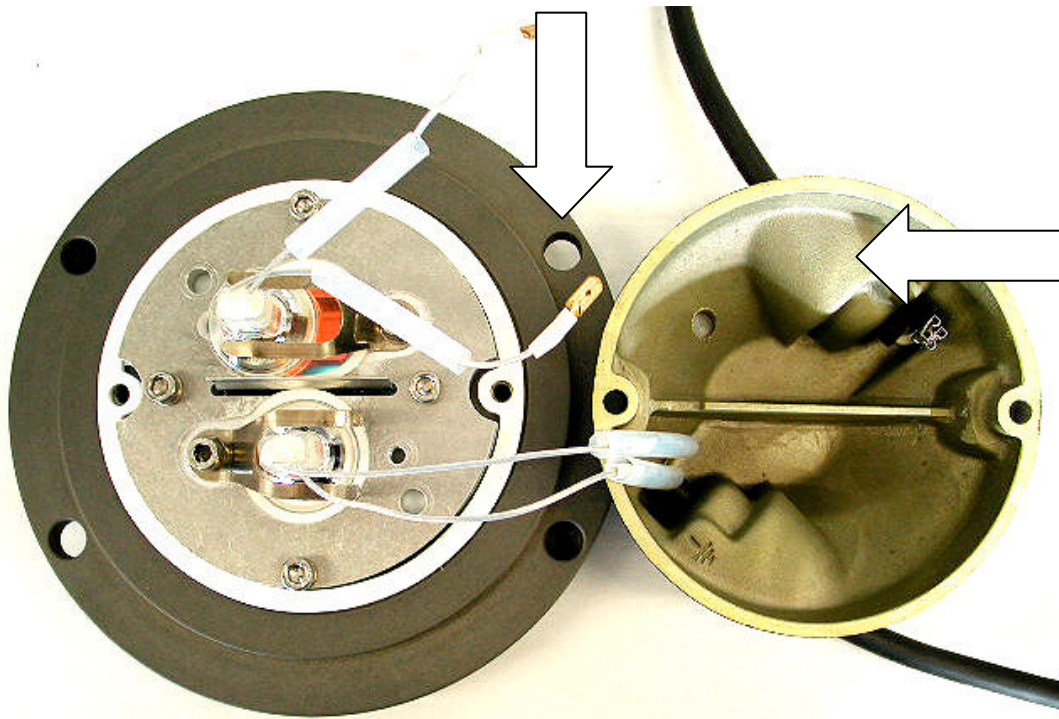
Fitting inverted and Bottom Cover dis-assembled.
